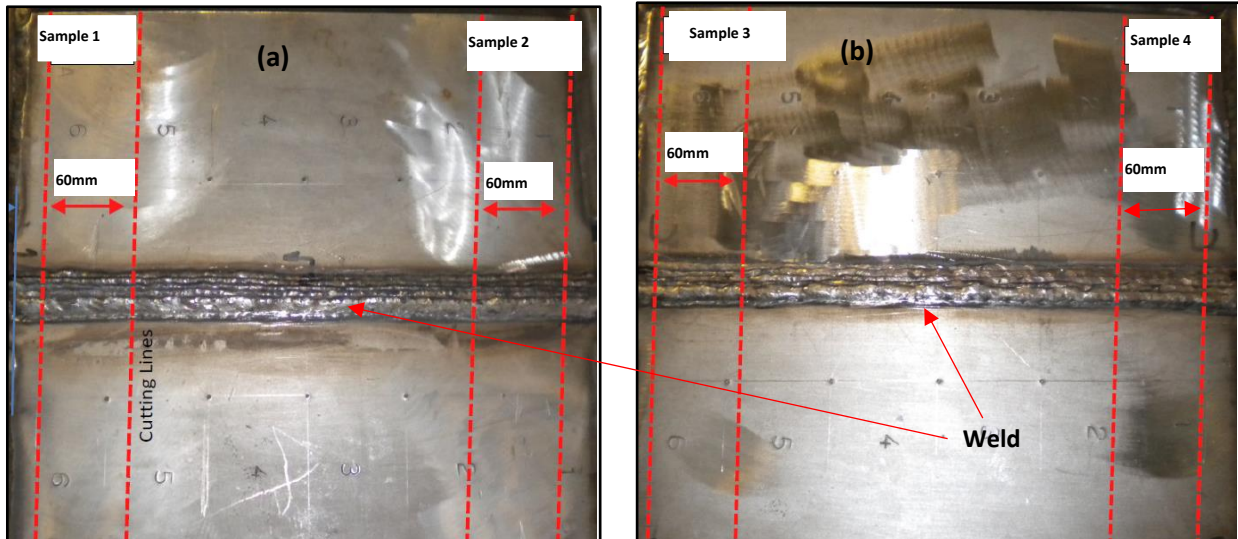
(a) Plate 1- SAF2205: 2× Samples from bulk material, (b) Plate 2 - Additional 2× welded samples of SAF2205 extracted from the bulk welded plate, sample plated received from the industry.
